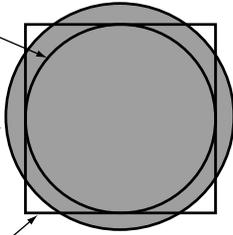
Footprint - 3 mils stencil - non solder mask defined
